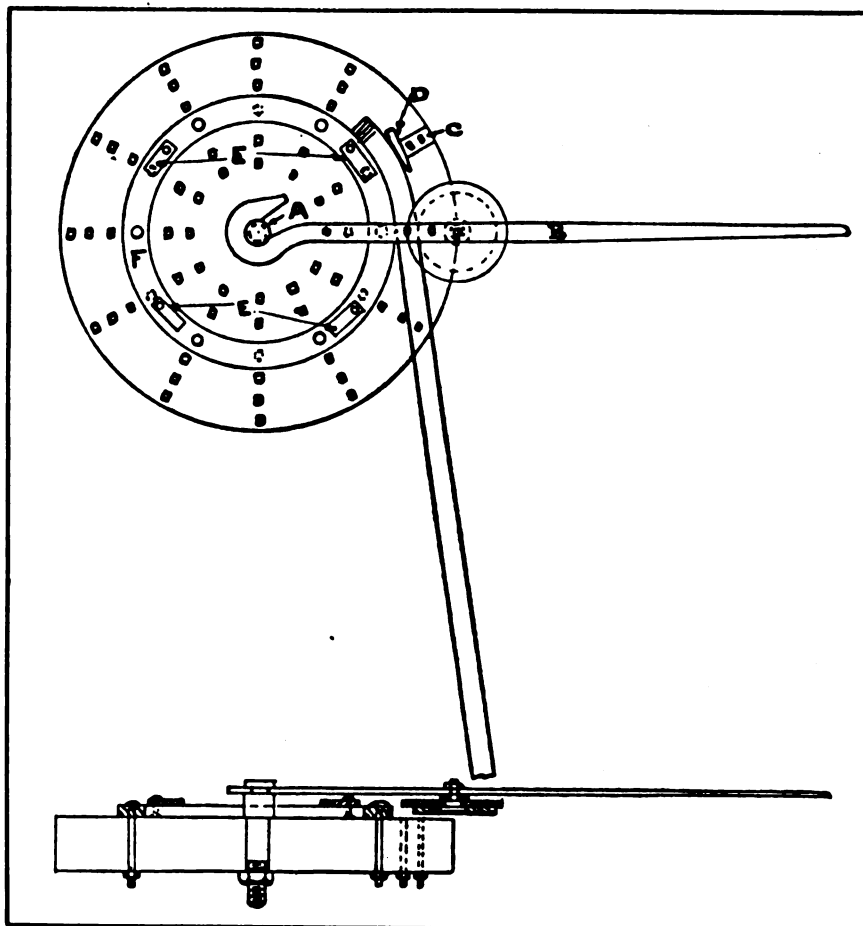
A BENDING MACHINE OF ENGLISH DESIGN
